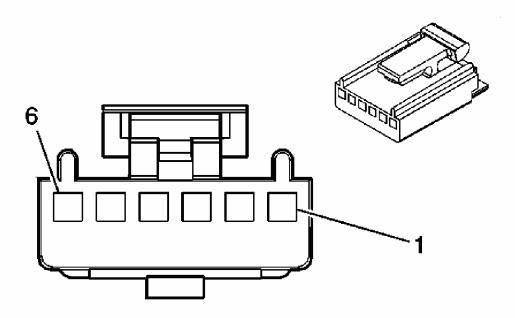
Steering Angle Sensor (JL4) Connector End View Courtesy of GENERAL MOTORS CORP.
